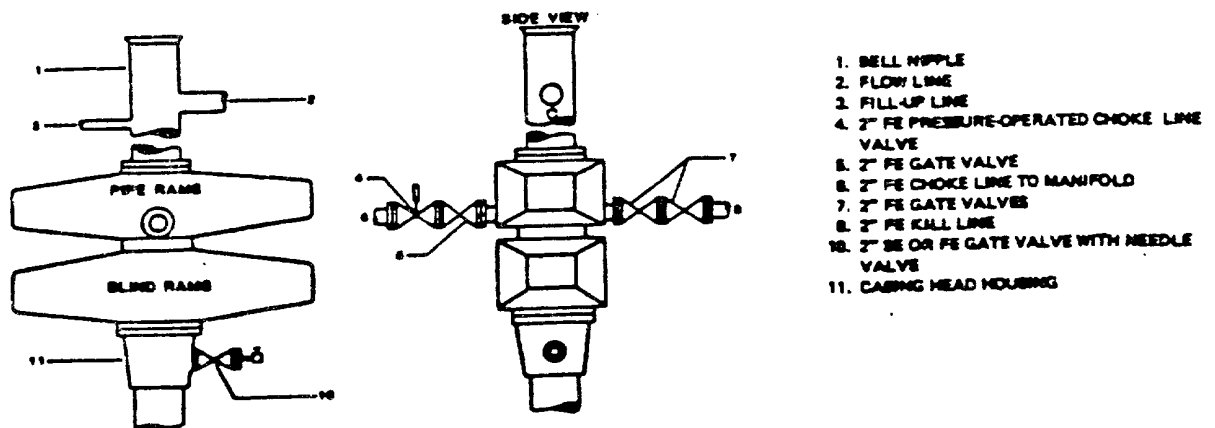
Standard Hydraulic Blowout Preventer Assembly
